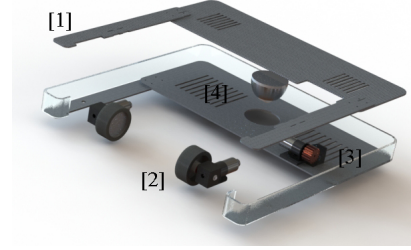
The chassis. Part [1] is the U-shaped CF plate. Part [2] is the dynamic set. Part [3] is a motor used to drive the roller. Part [4] is an universal driven wheel.
